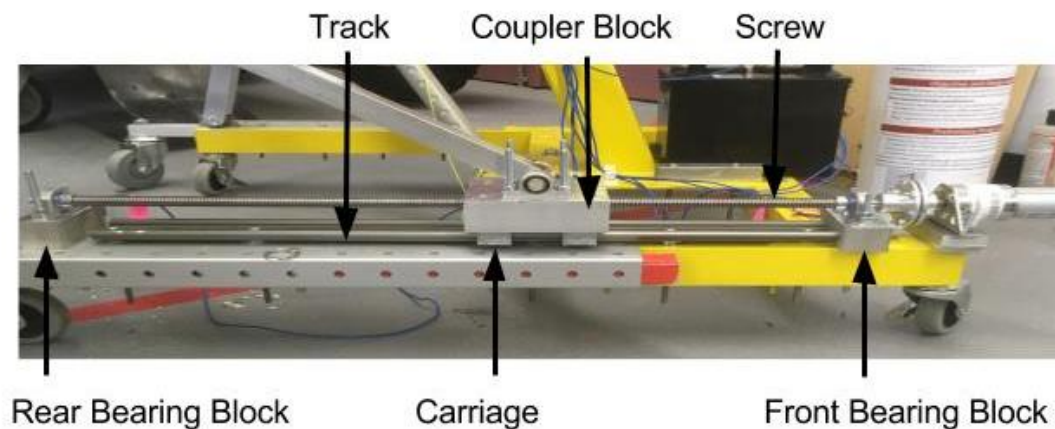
Screw Mechanism Fully Assembled as Linear Actuator
